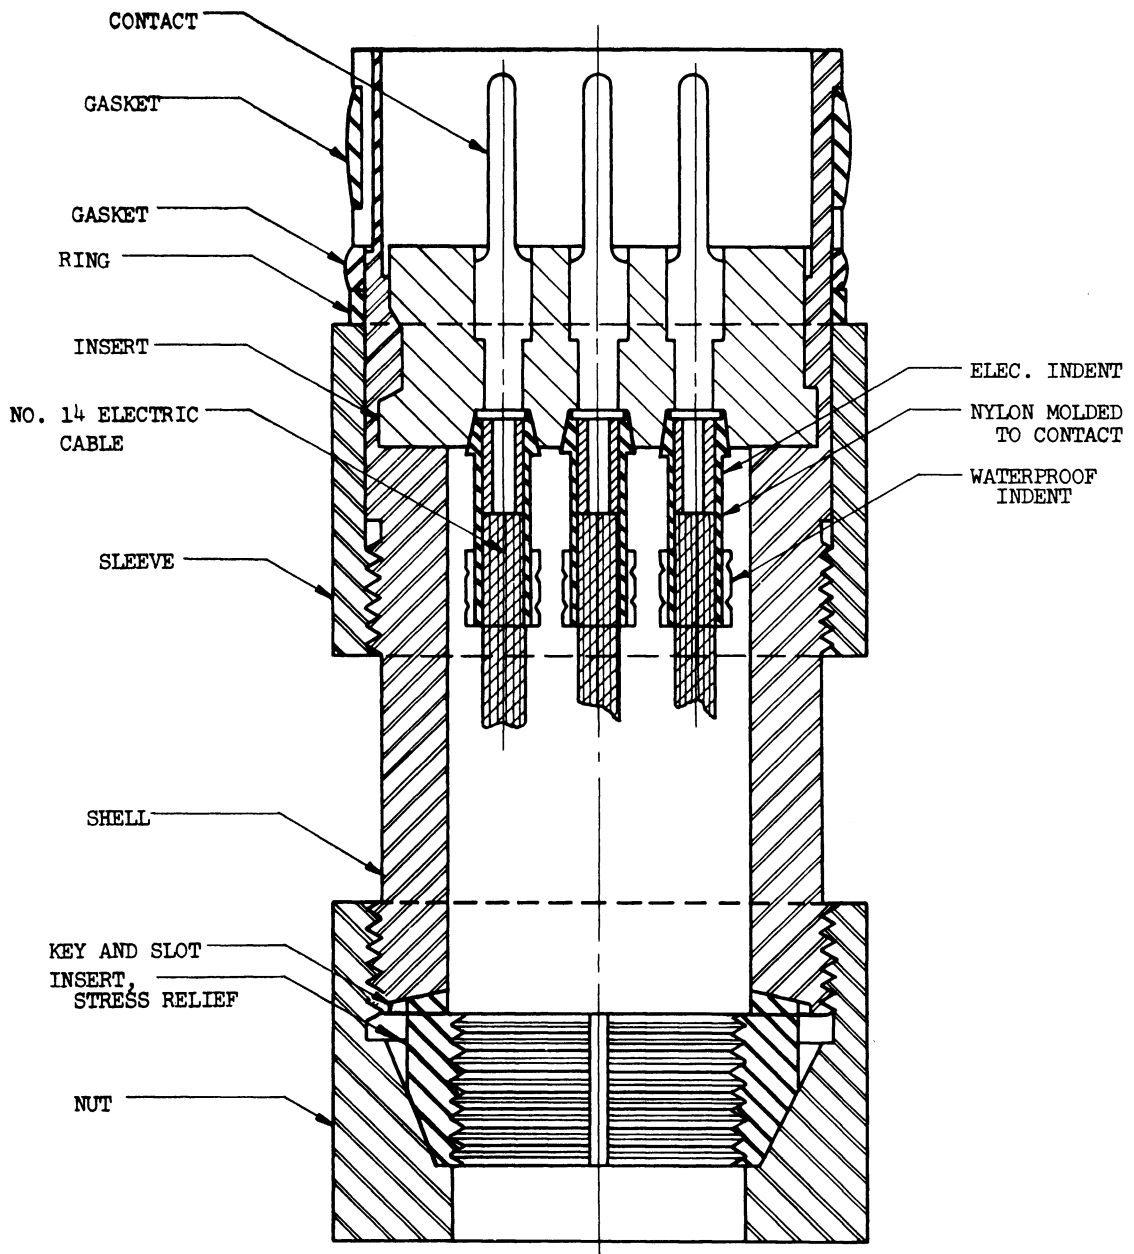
Trailer-plug assembly showing waterproof crimp-type pin contacts.
